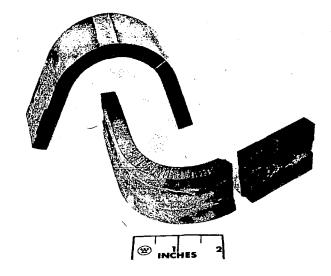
FS-85 Plate Weld Macrosection
